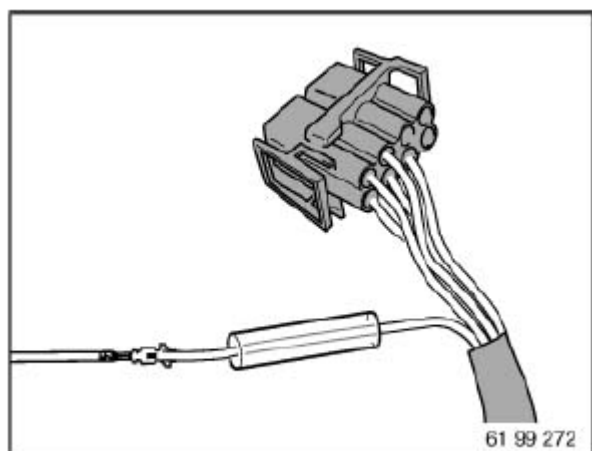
Identifying Crimp Unused Wire End To Butt Connector
